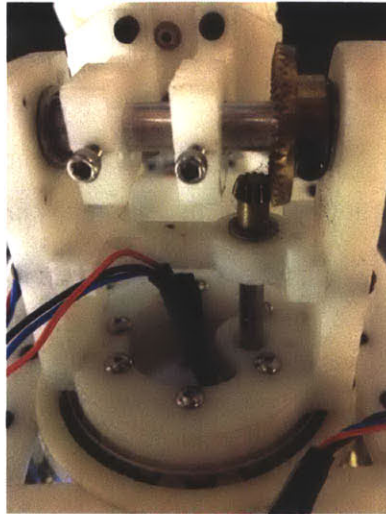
Bevel gear mechanism to operate shoulder lifting in old Huggable
